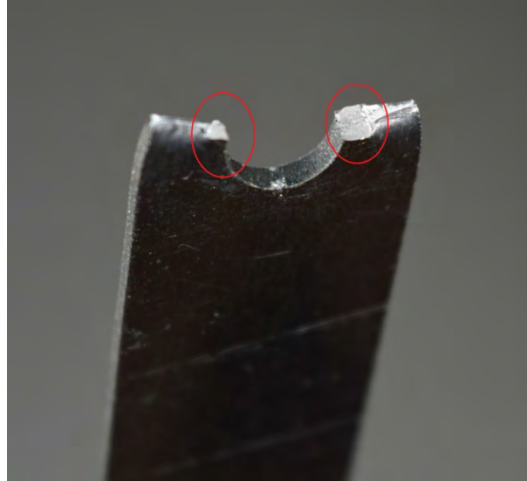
Macroscopic Fracture of a specimen before Cold Expansion
